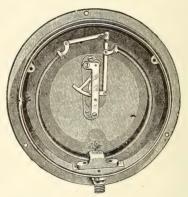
SECTIONAL VIEW AMERICAN PRESSURE GAUGE.
